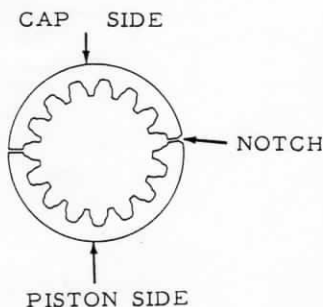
The connecting rod bearing cap used on most models. Retainer half containing seven rollers should be in connecting rod (toward piston). Rod cap is positioned over other side.
